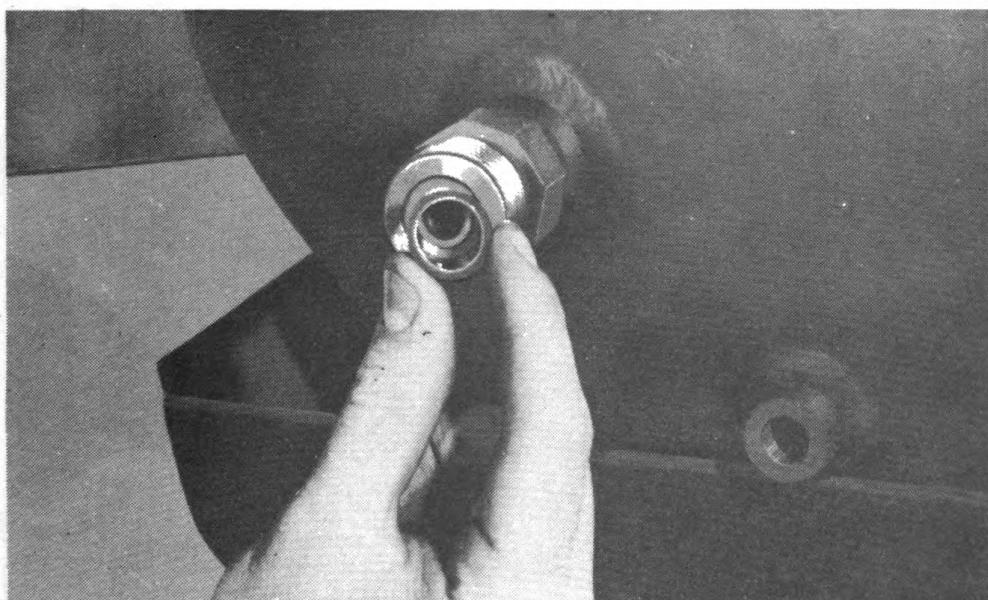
Placing synthetic rubber washer in recess of fuel container pressure inlet union.
